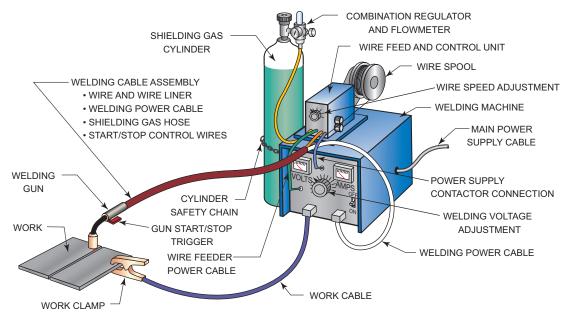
Basic FCA welding equipment identification.
